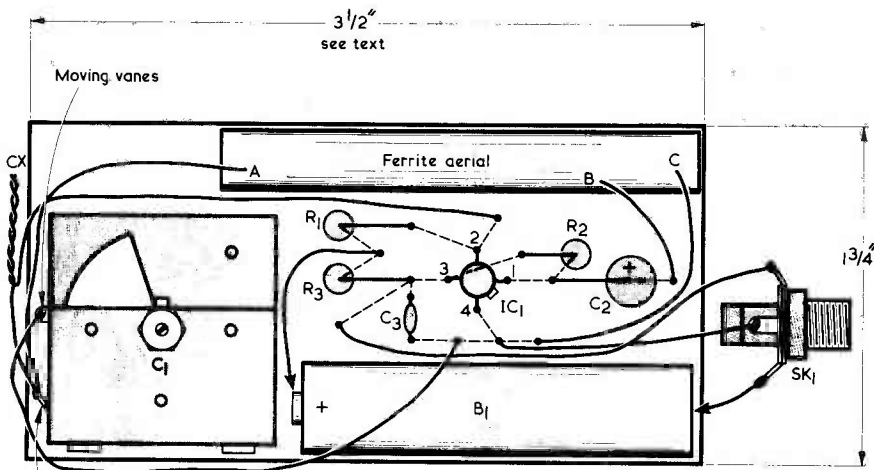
Layout and wiring on the component panel. This is reproduced full size to assist in construction
